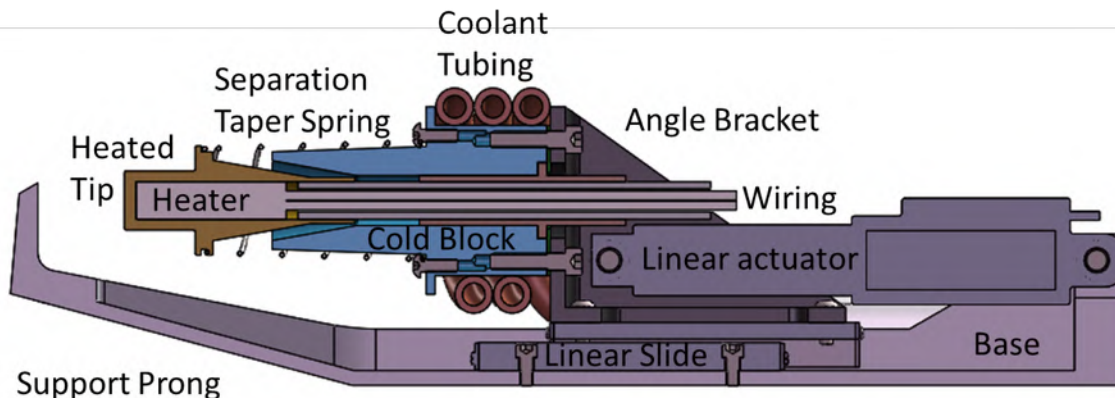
Cross-Section of the new Joiner Spinneret with Linear Actuator and Support Prong.
